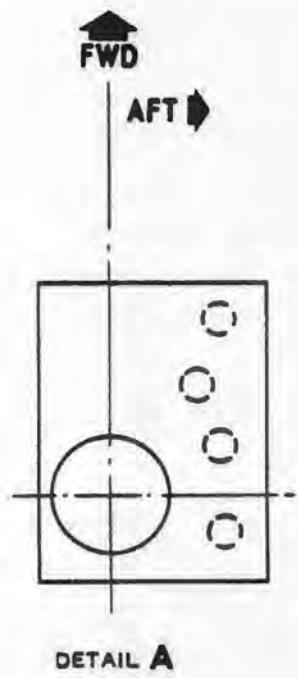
Positioning of rod end bearing to servo actuator
